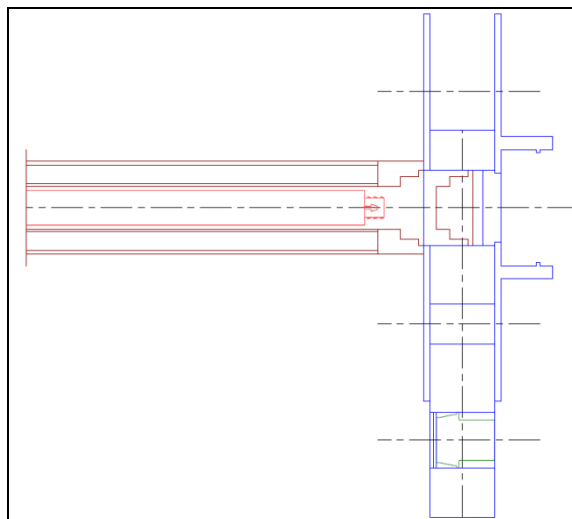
Transfer shield in first position for removal of LWT® cask end shield plug.
